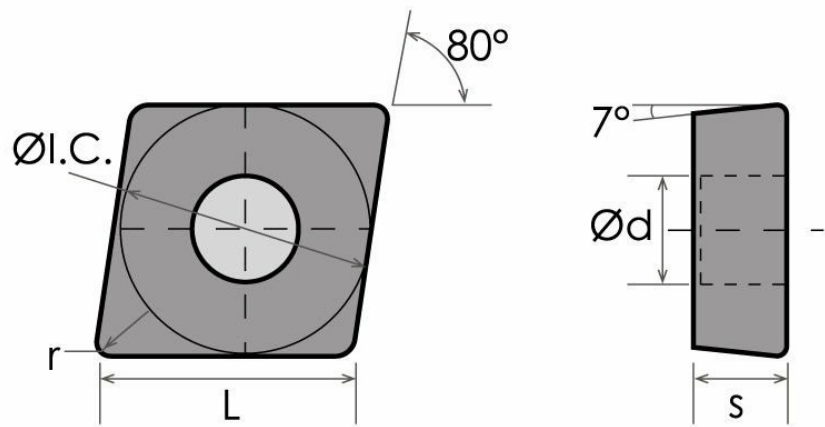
Technical drawing illustrating the dimensions and angles of a CPMT insert, including the inscribed circle (I.C.), length (L), thickness (S), and corner radius (R).
